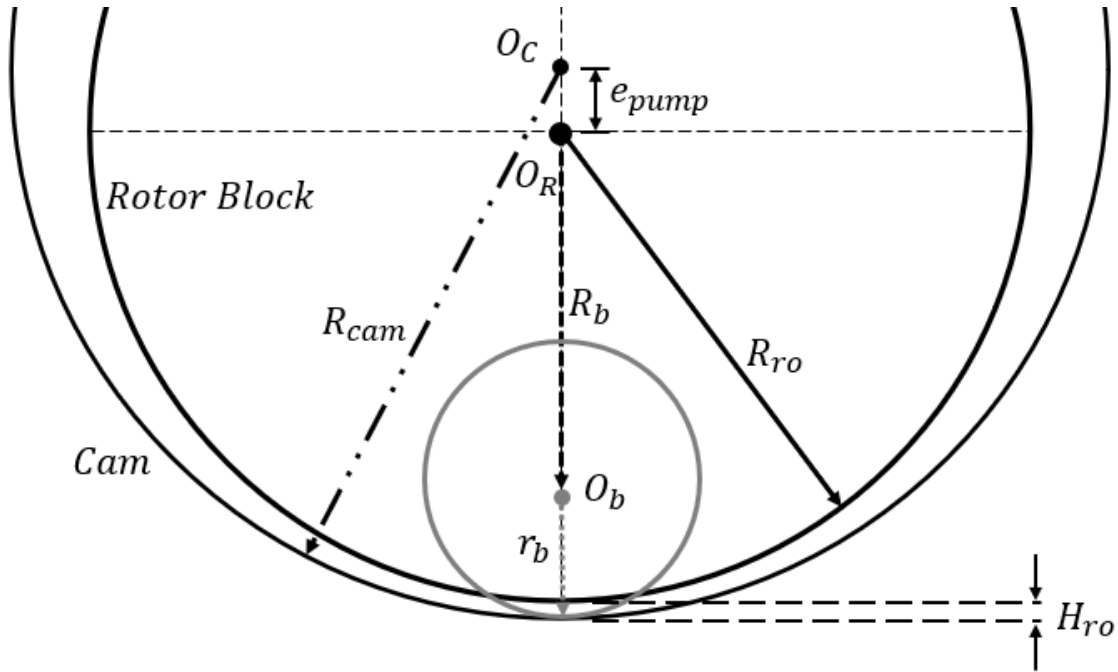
ROTOR BLOCK AND CAM CLEARANCE AT TOP DEAD CENTER
